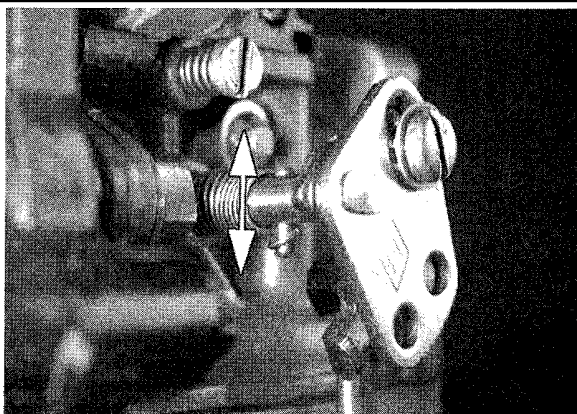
When properly adjusted, the roll pins in the carburetor shafts will be vertical at WOT
